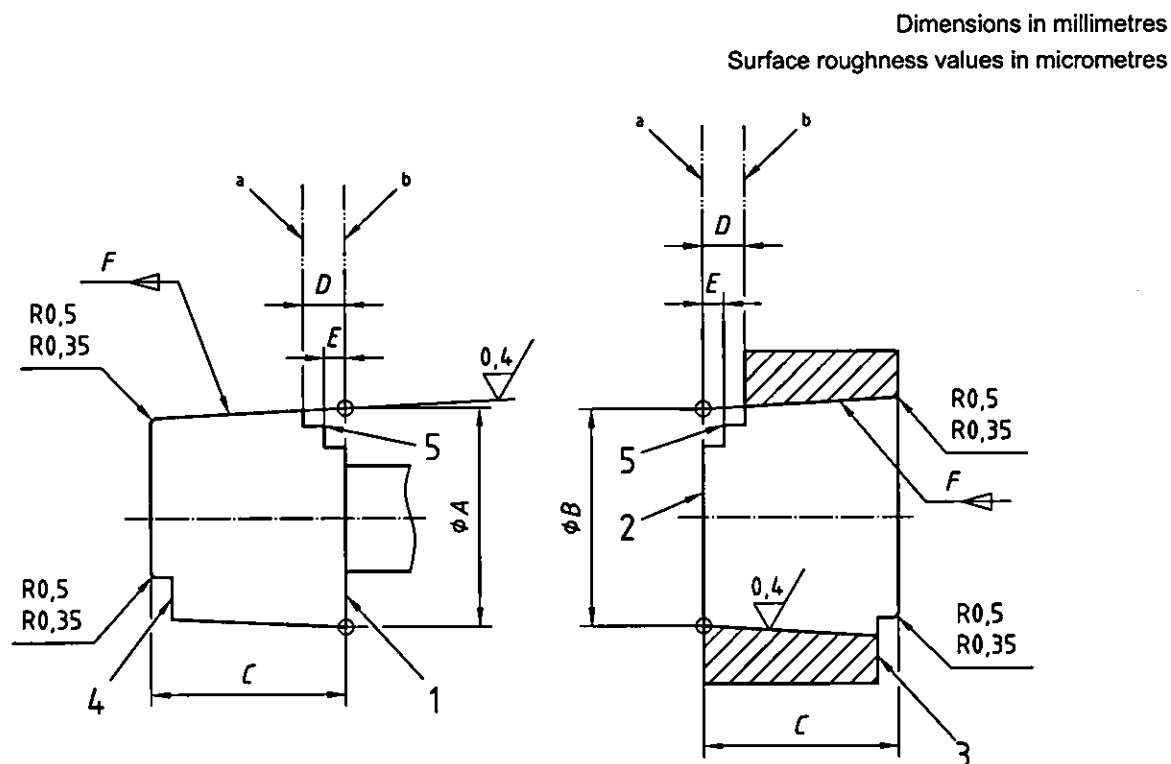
Plug and ring test gauges for conical connectors made of metal
